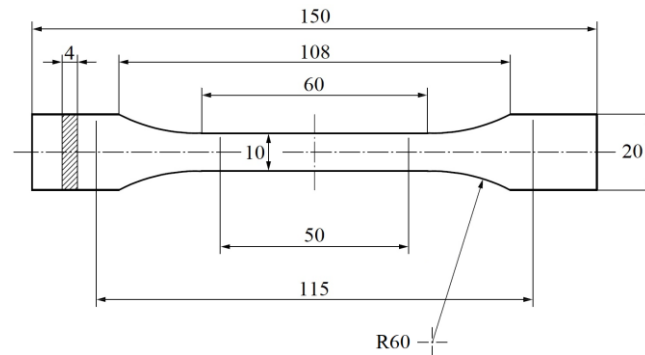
Type 1B tensile test specimen according to ISO 527-2 standard. Dimensions are expressed in millimeter.
